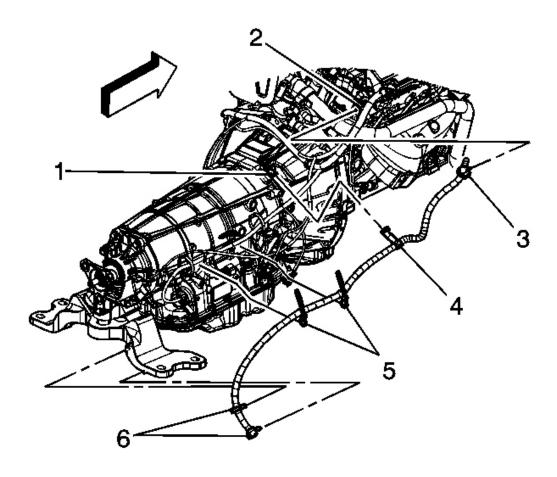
View Of Vent Hose Assembly Courtesy of GENERAL MOTORS CORP.
